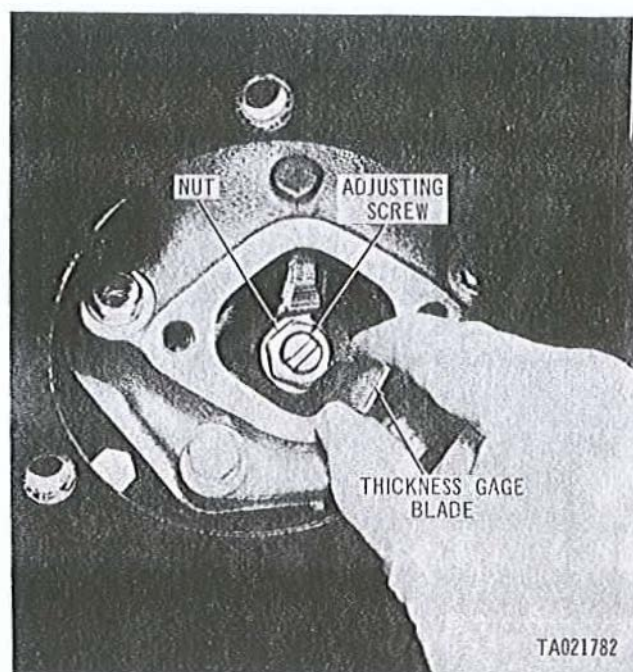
Setting intake valve clearance for cylinder 6R.
